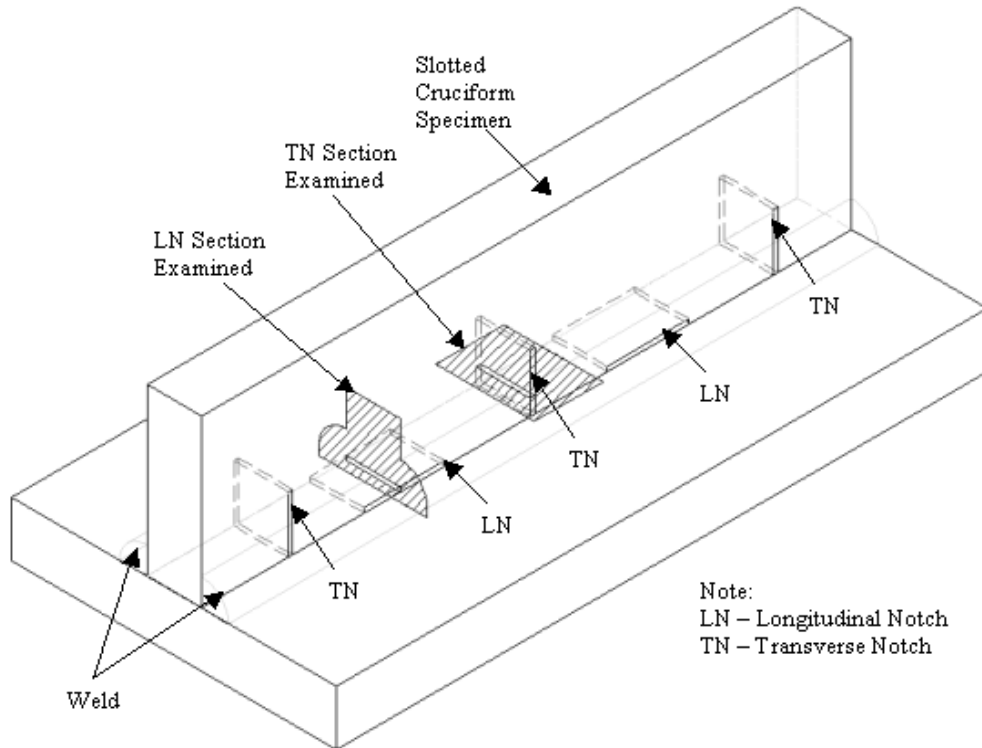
Schematic illustrating how the longitudinal and transverse notched specimen were sectioned.
